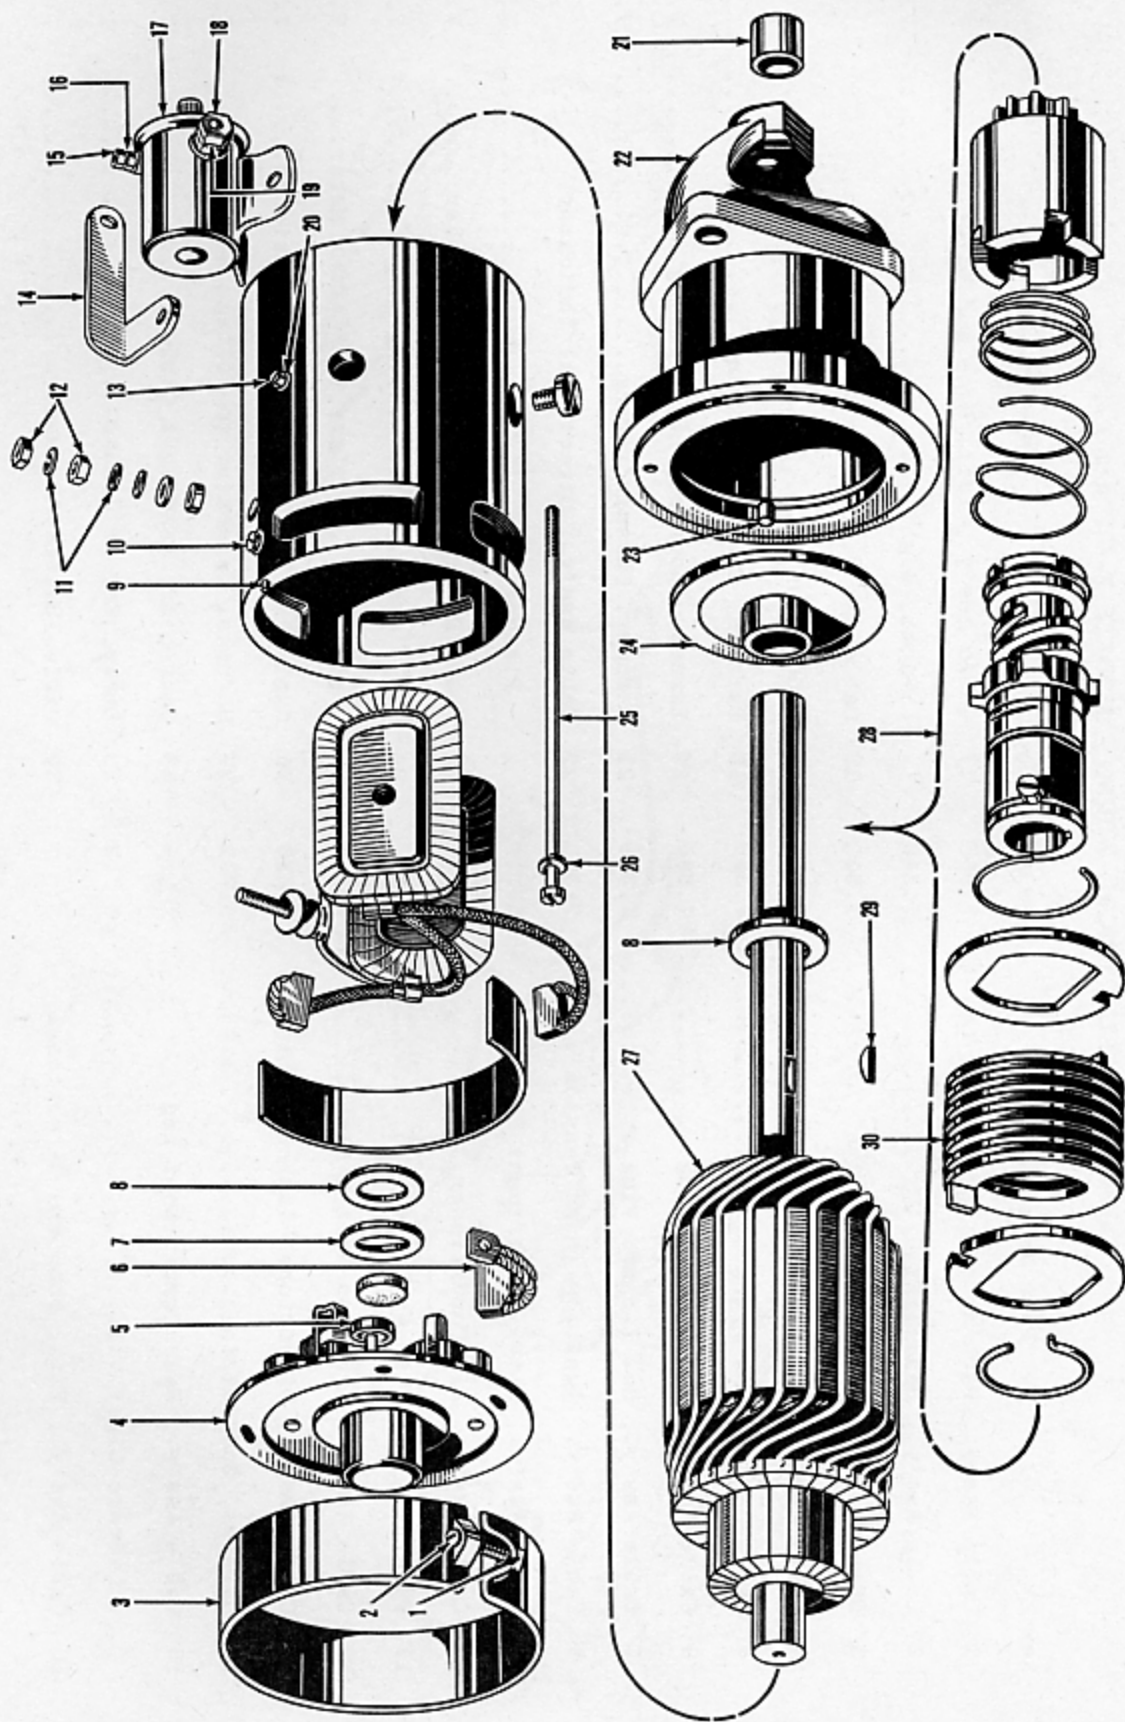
TYPICAL STARTER - EXPLODED VIEW
